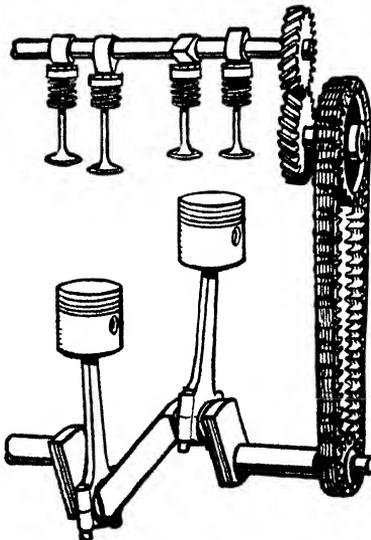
Overhead Cam-shaft driven by Chain, with Gear Intermediate to allow Easy Removal of Cylinder Head
